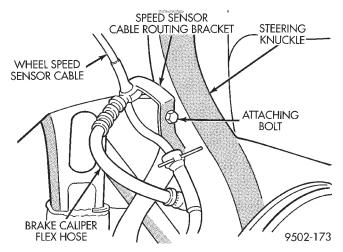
Wheel Speed Sensor Cable Routing Bracket
